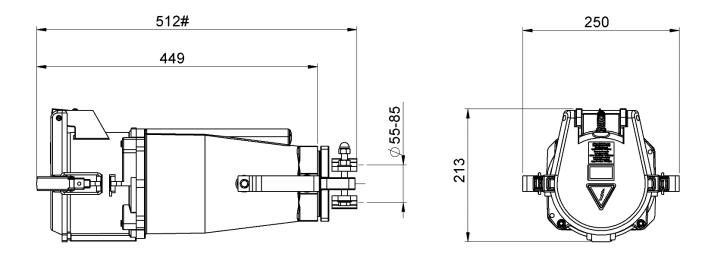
Dimensions Female Connector FC A-Line (500 A – 600 A) in mm
